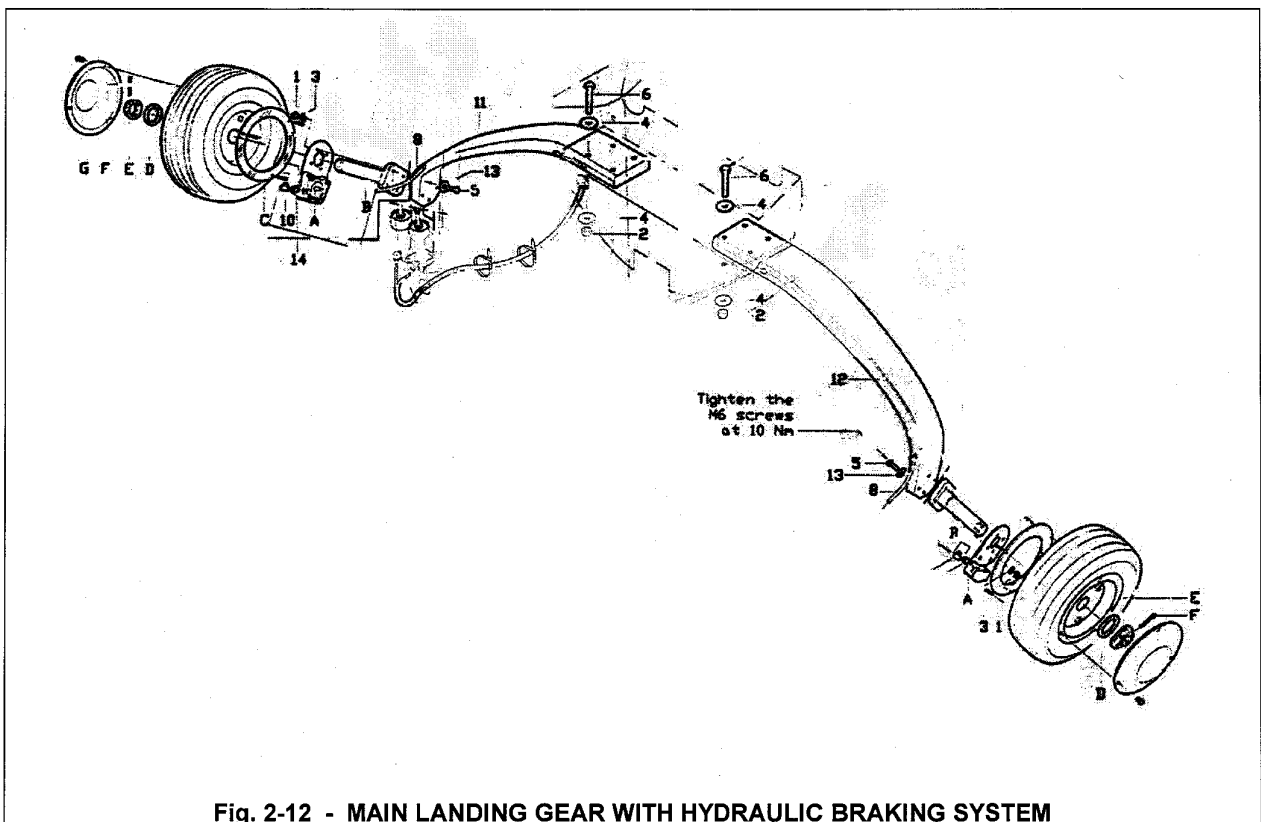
MAIN LANDING GEAR WITH HYDRAULIC BRAKING SYSTEM
